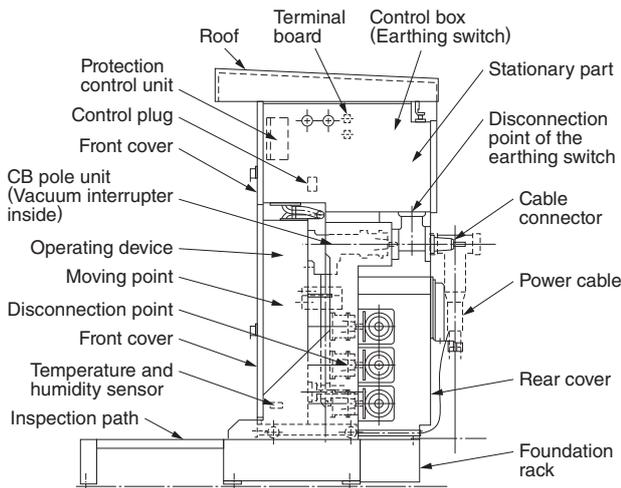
Cross-Sectional View of Smart SIS (Feeders)
